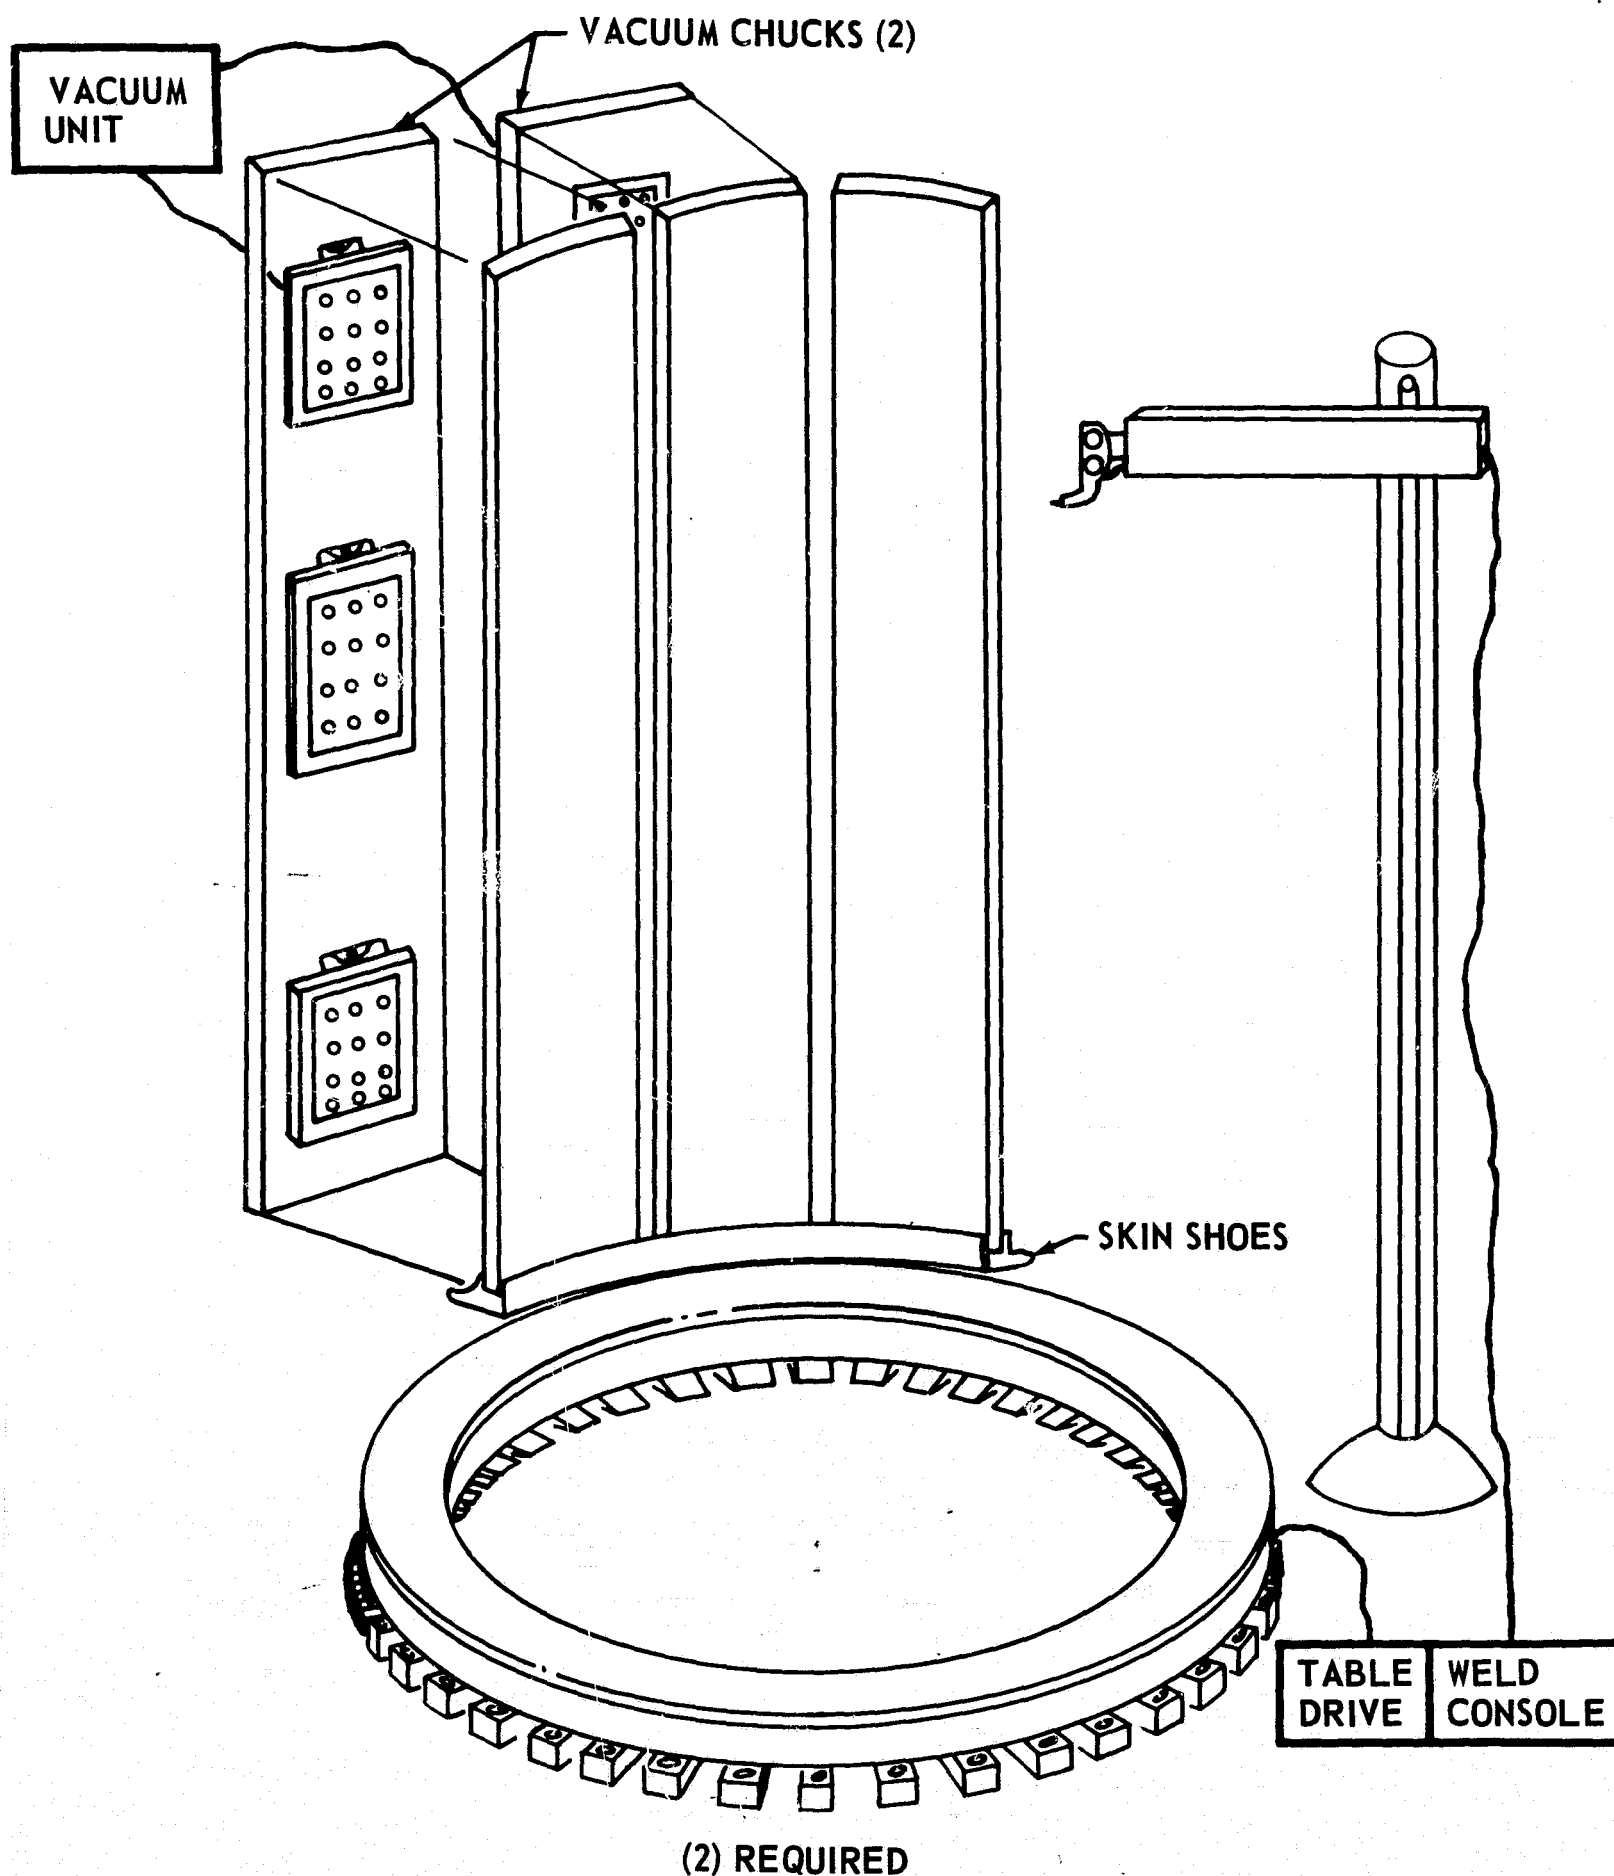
SKIN CYLINDER ASSEMBLY
